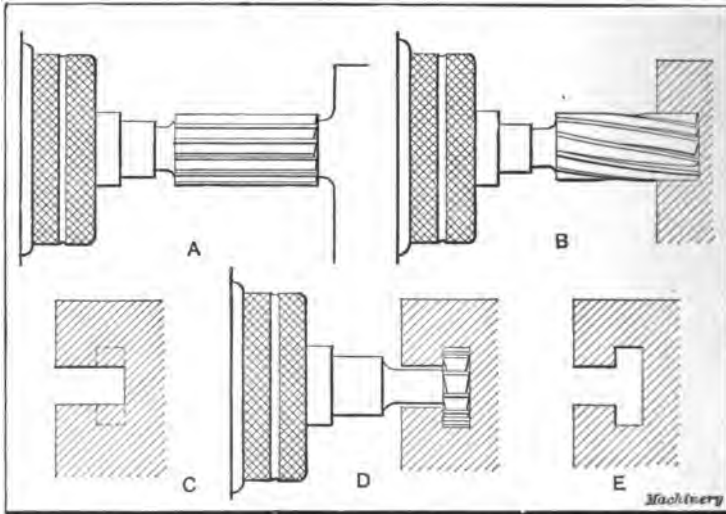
End Milling—Diagrams illustrating use of T-slot Cutter
